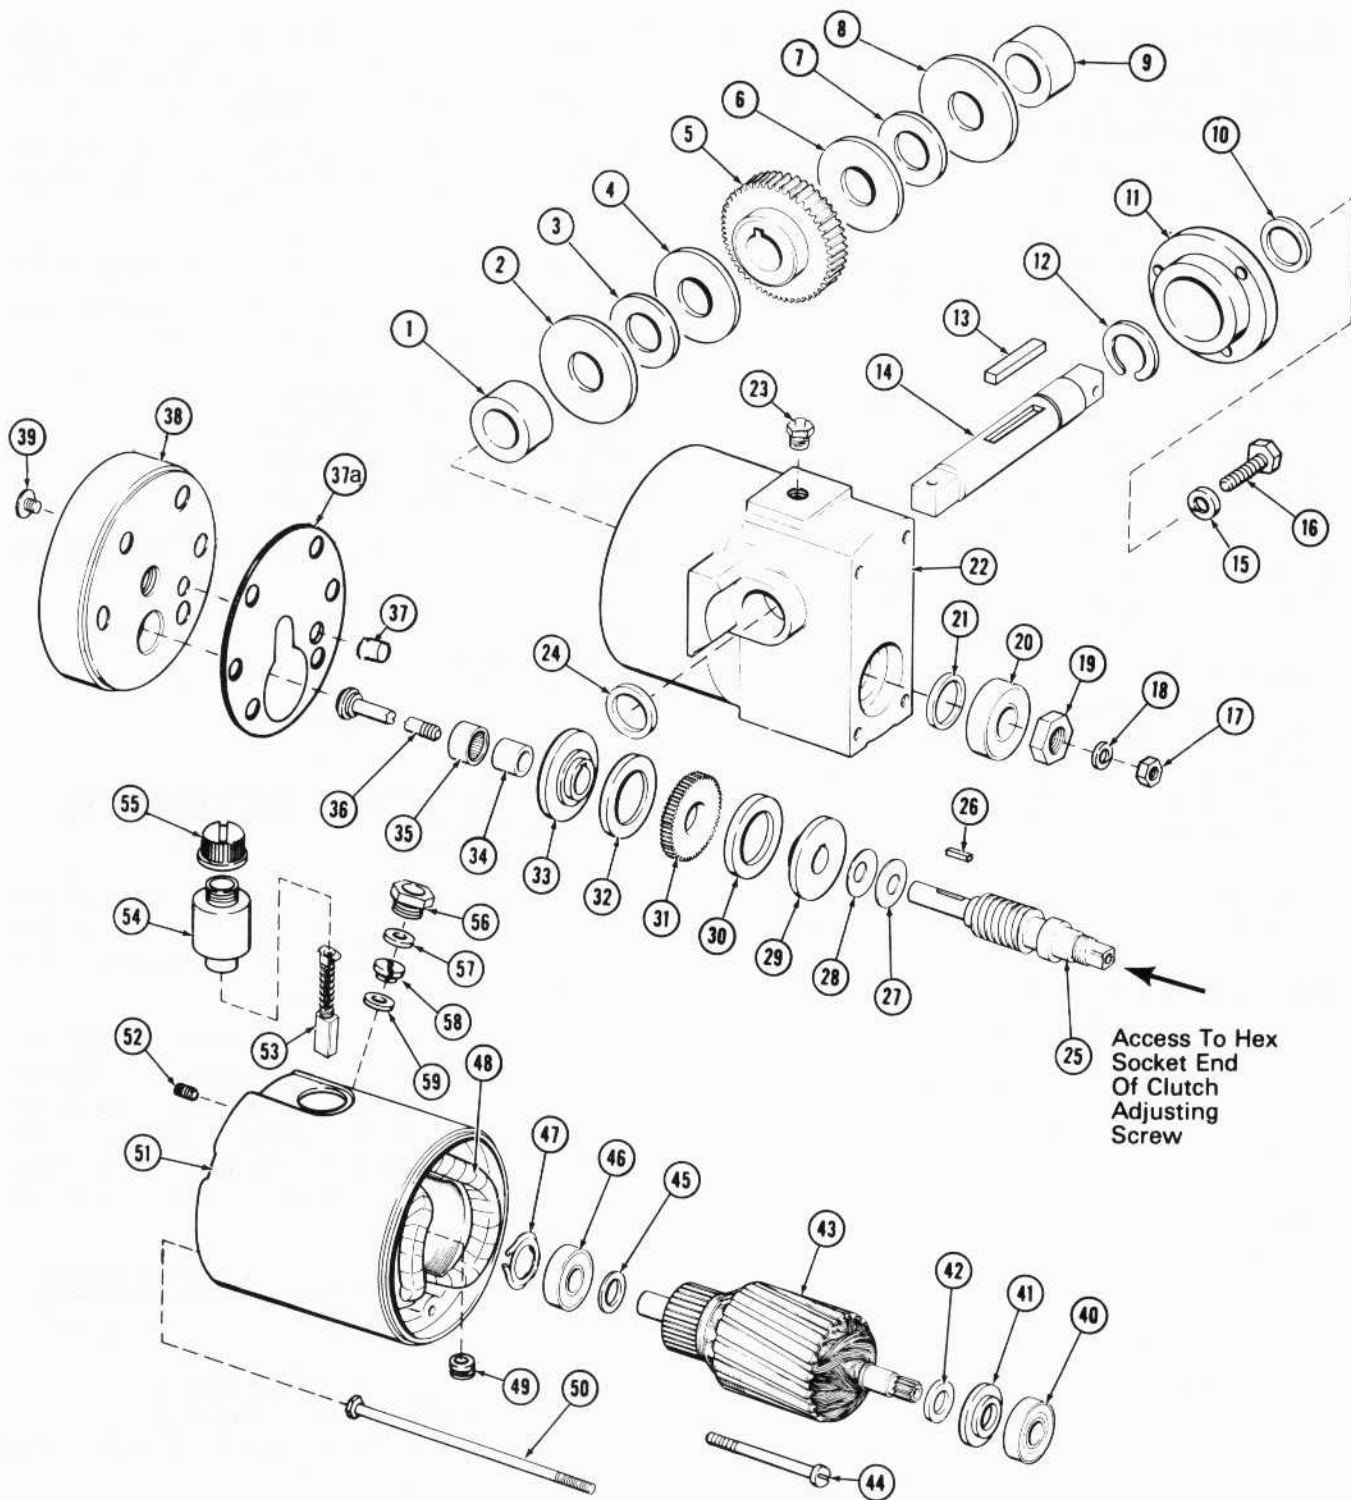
Motor Modules 8422928 And 8449939, Partial Exploded View
